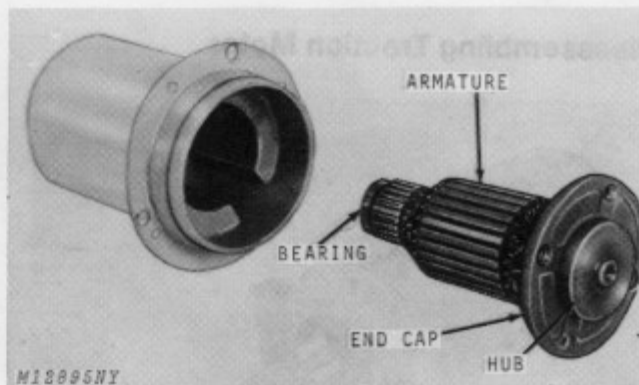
Removing Armature, Hub, End Cap and Bearing
